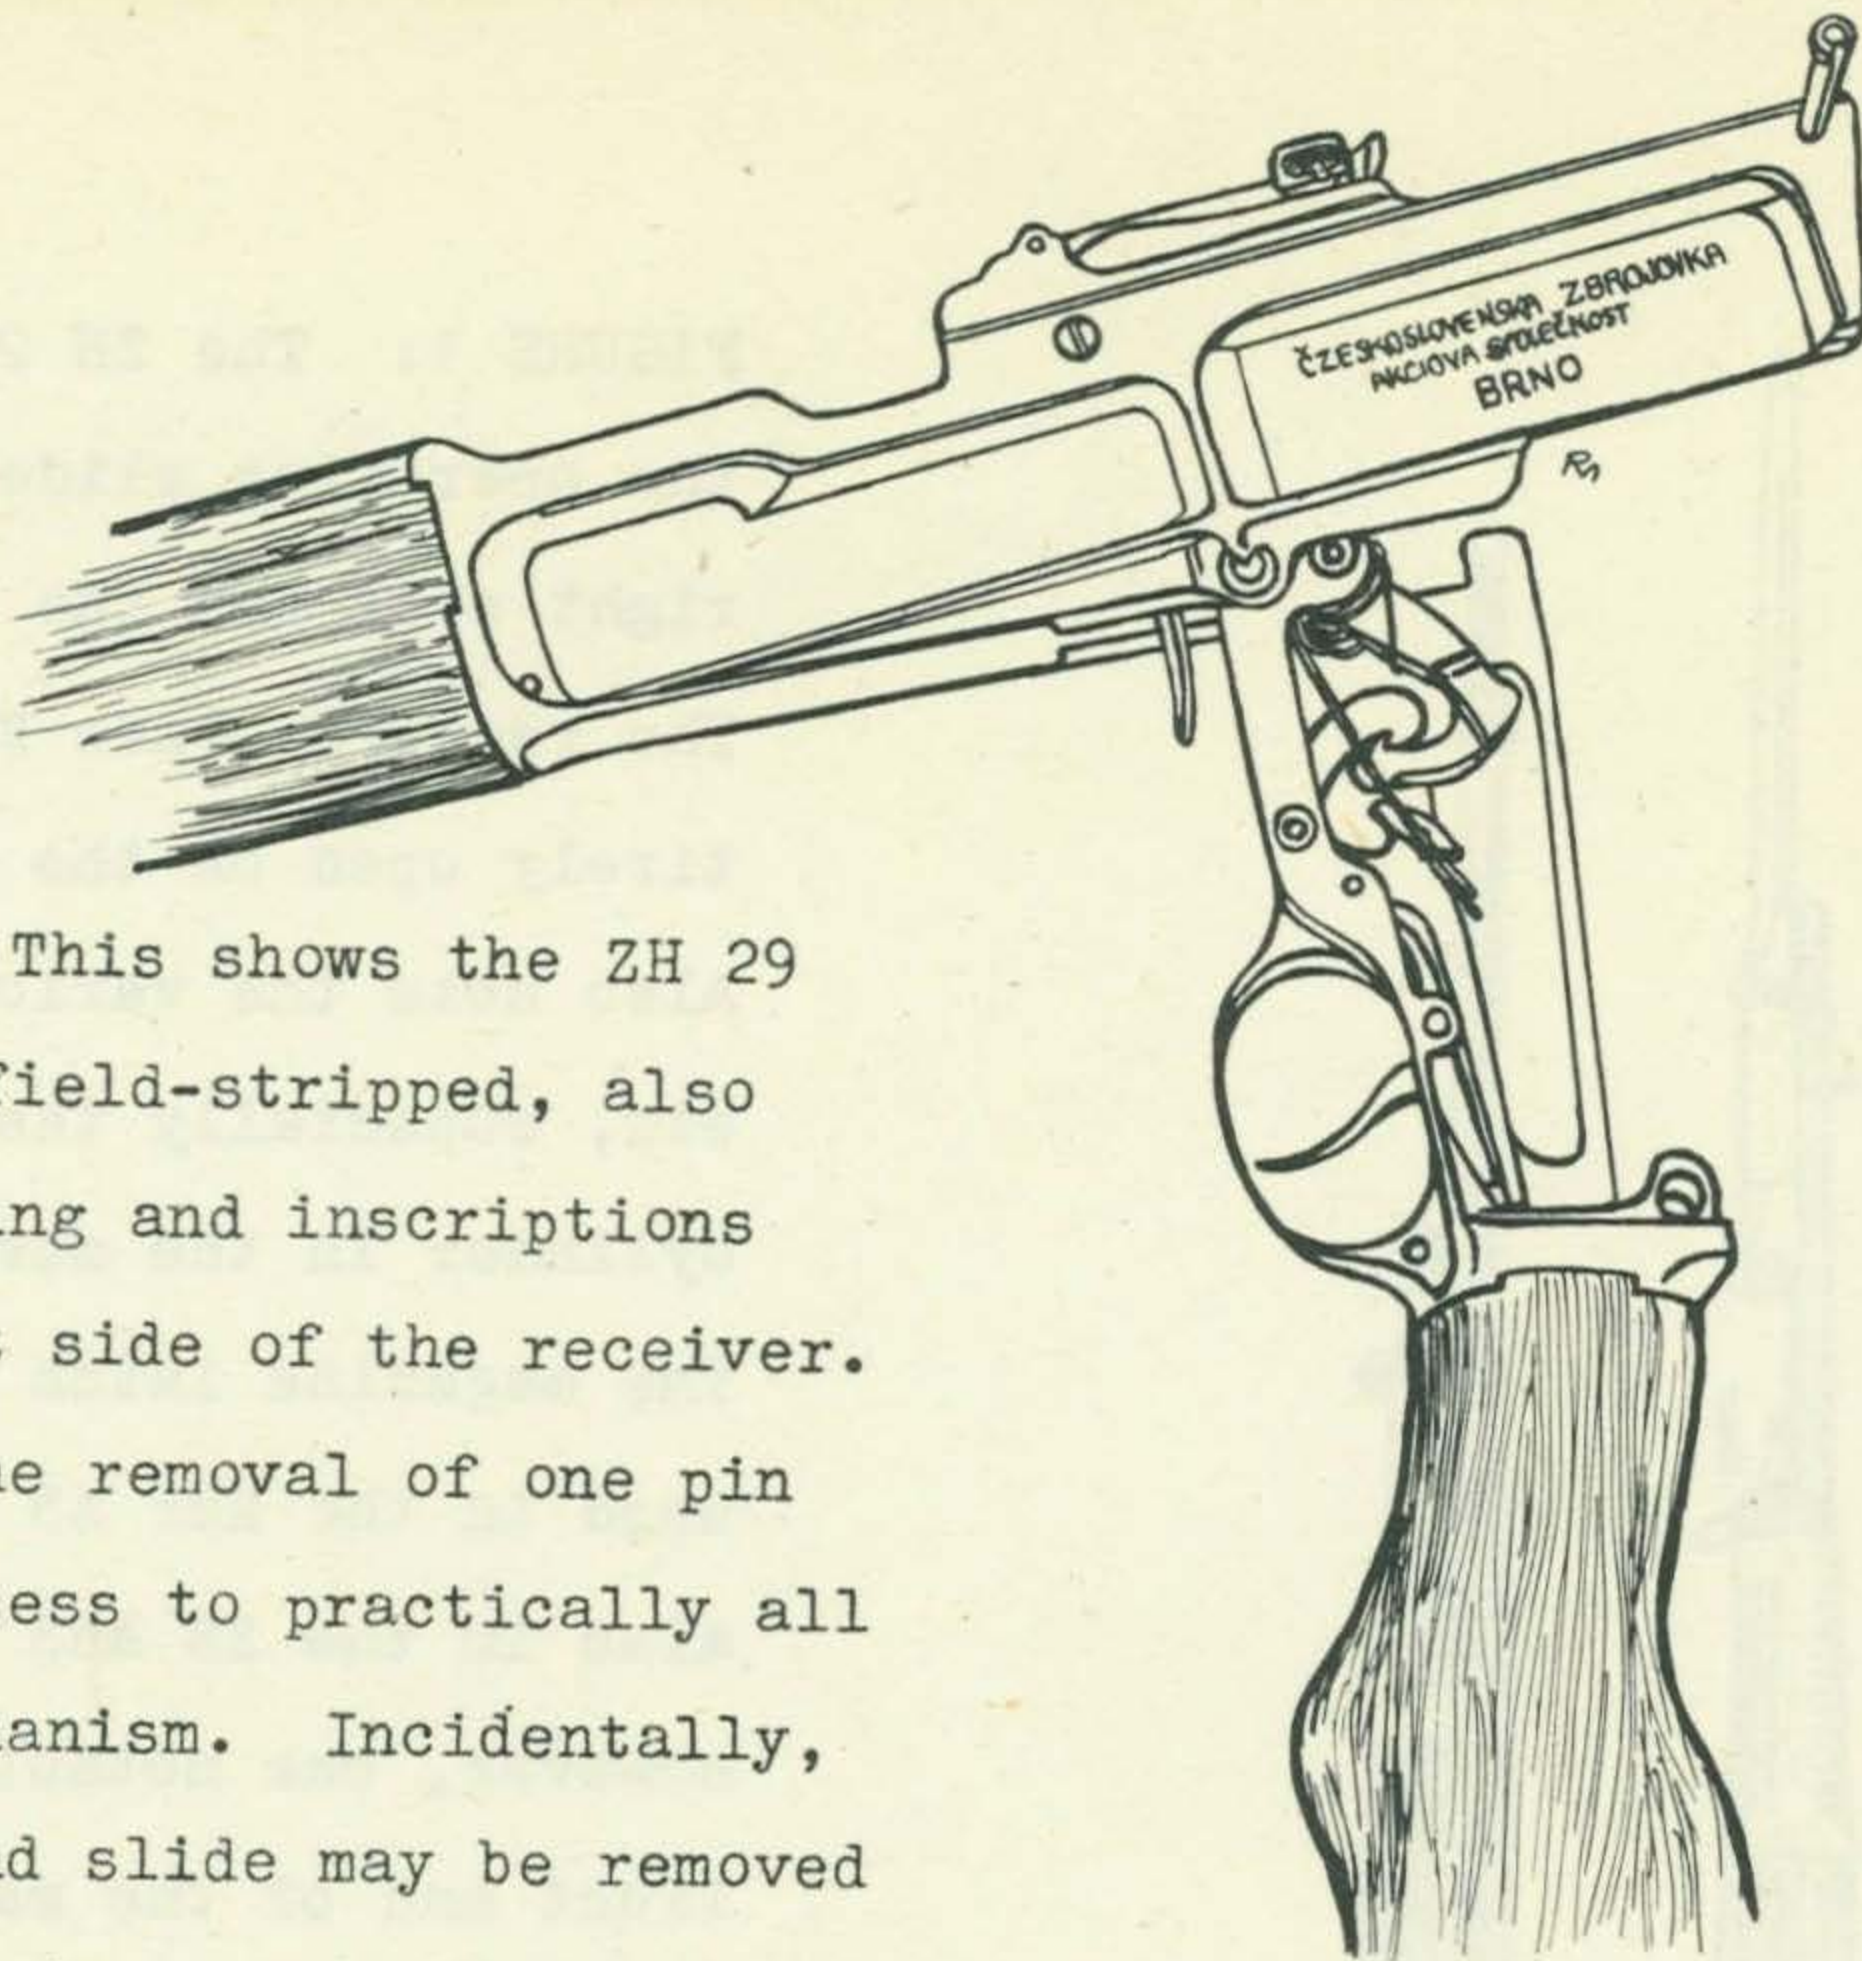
This shows the ZH 29 partially field-stripped, also the machining and inscriptions on the left side of the receiver. Note how the removal of one pin permits access to practically all of the mechanism. Incidentally, the bolt and slide may be removed when the parts are in this position. The screw (head visible), just below the axis pin of the rear sight, holds a replaceable locking shoulder or key. (See FIG. 4)
